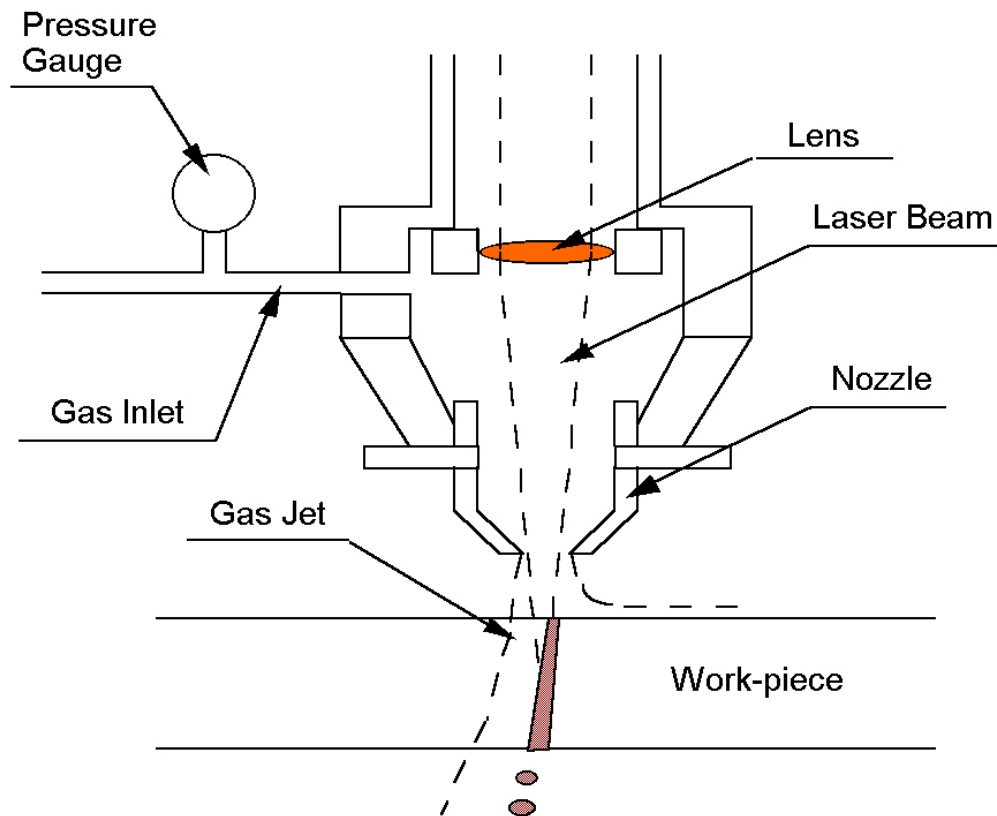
Scheme of laser cutting machine cutting head [11]
